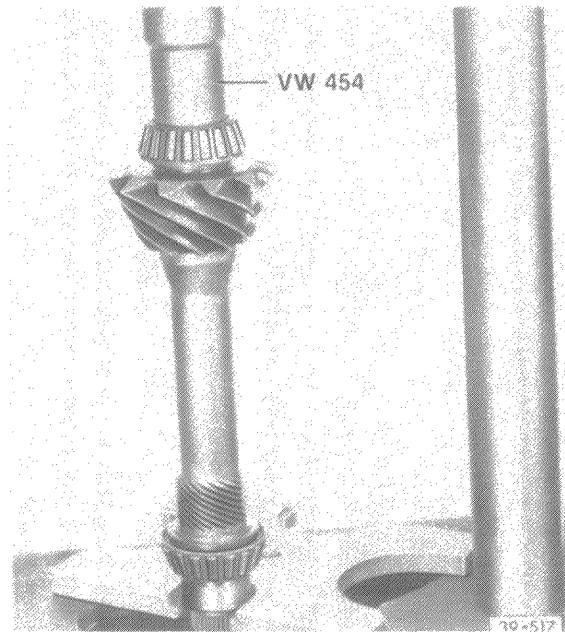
Pinion bearing inner race/Oil seal sleeve, removing
